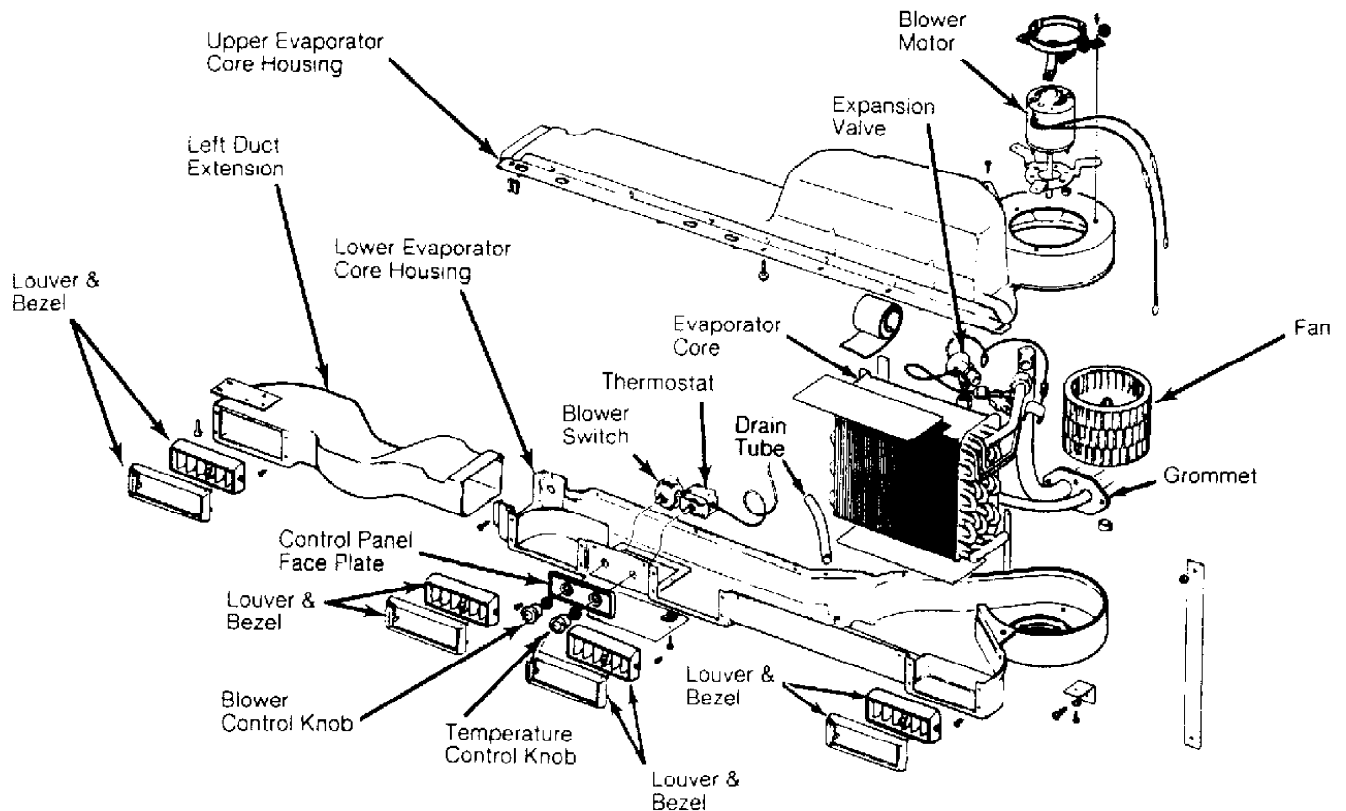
Exploded View of Wrangler Evaporator Housing
